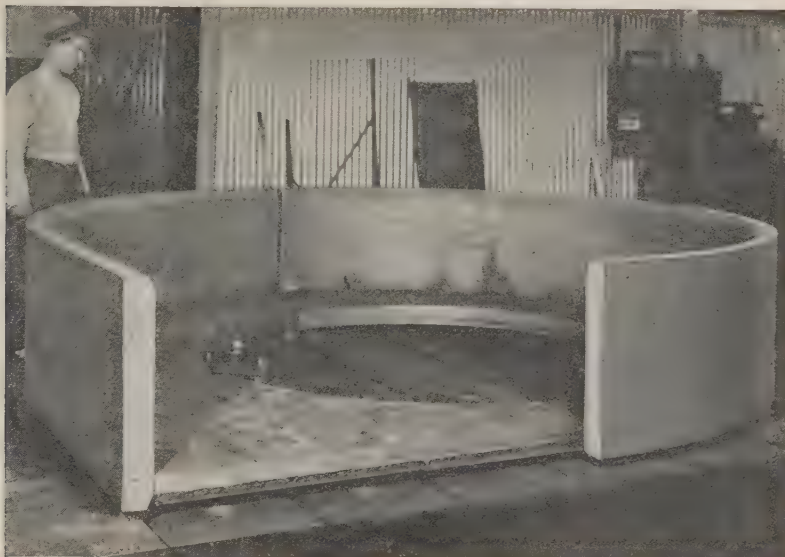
PLATES 4 IN. THICK FORMED ON BENDING ROLL
